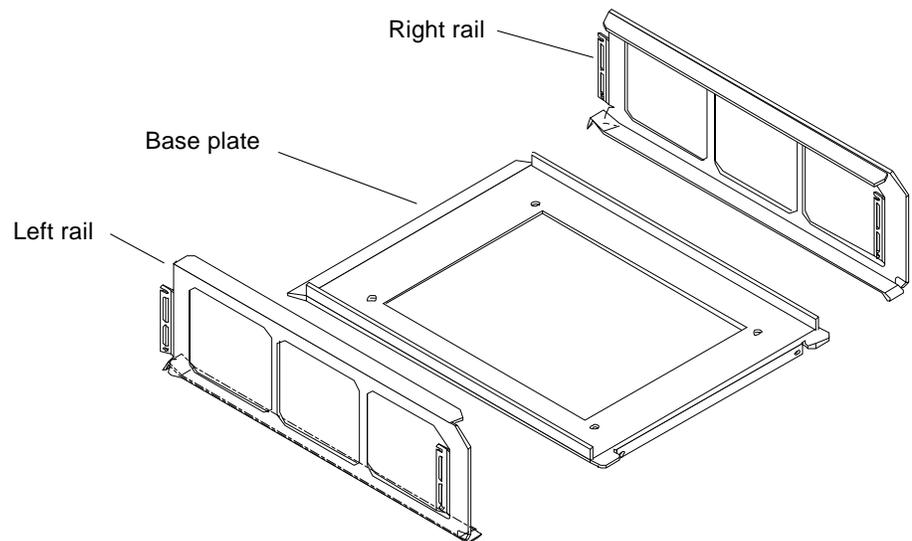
Rack Mount Kit Side Rails and Base Plate
